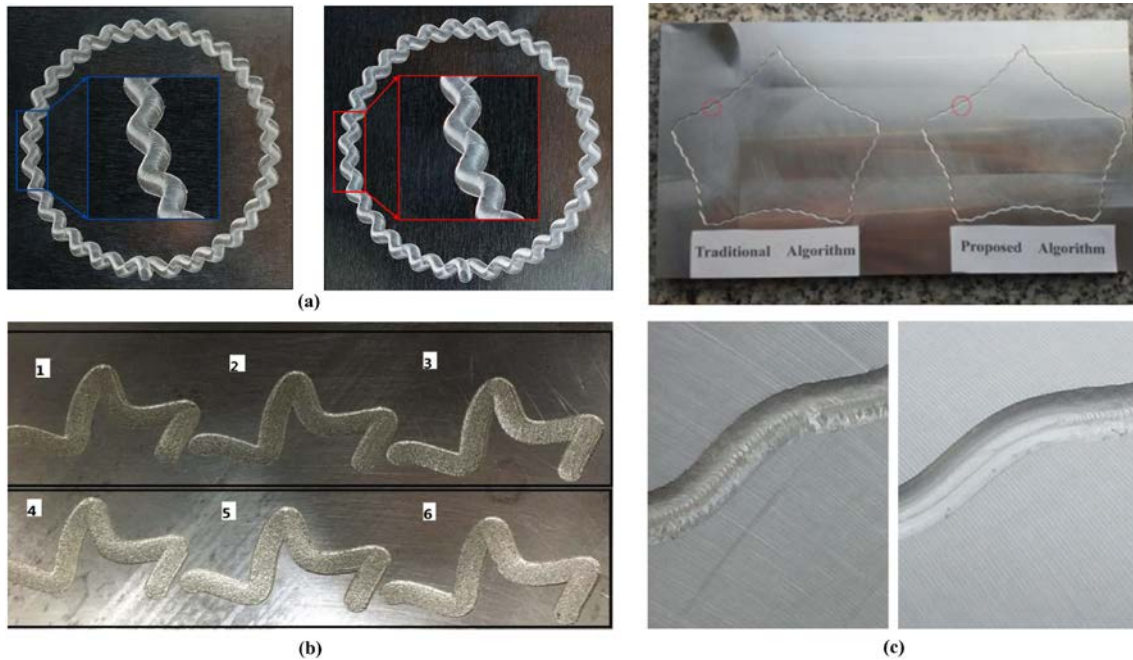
Surface finish comparisons in three-axis machining, which the smoothed one can have better surface finish. (a) Surface finish after real machining using different corner smoothing methods reported in Ref. 11; (b) Surface finish after real machining using different corner smoothing methods reported in Ref. 5; (c) Surface finish after real machining using different corner smoothing methods reported in Ref. 56.
